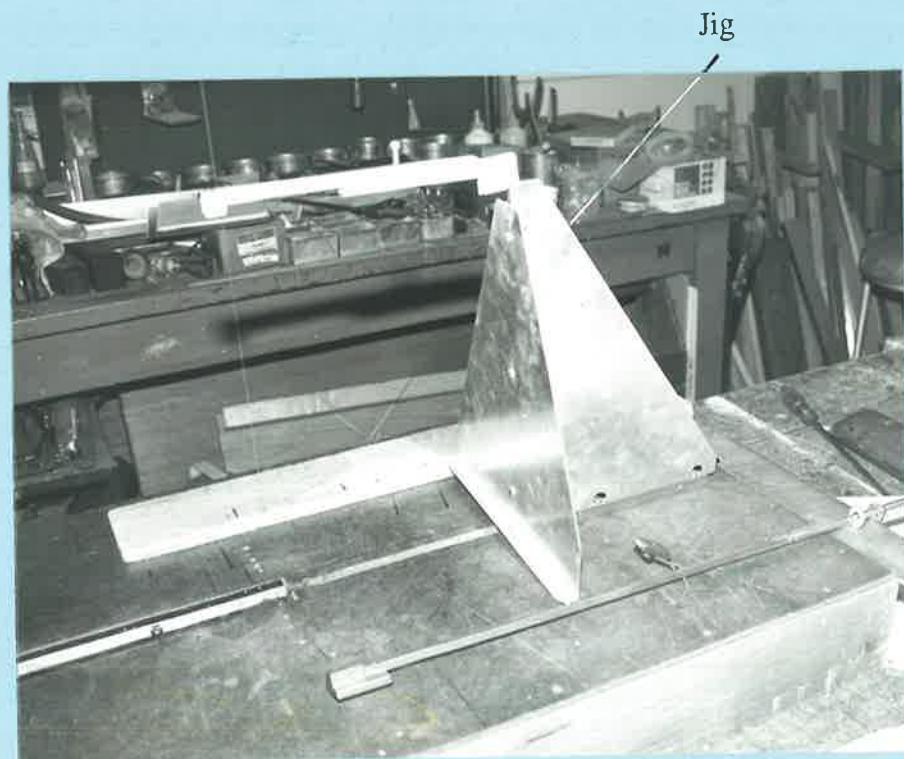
Pressed metal jig used to hold foam block so it can be cut into a cylinder.
